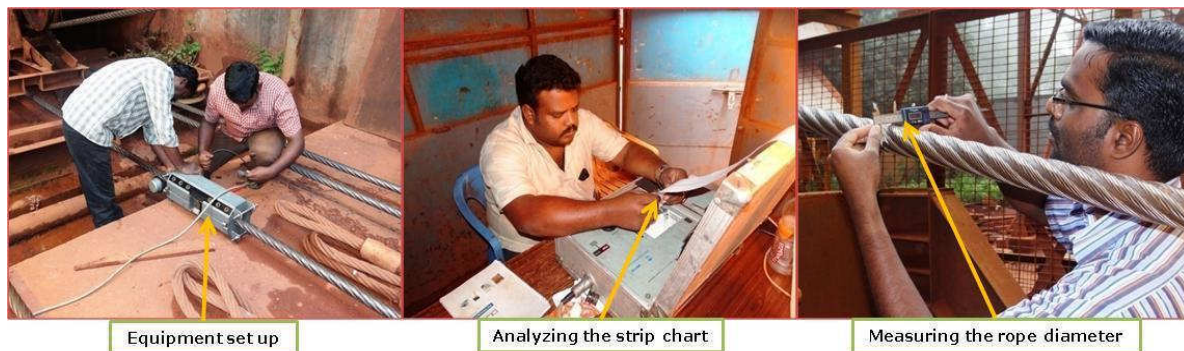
Inspection of cable belt drive ropes, M/s NALCO.
